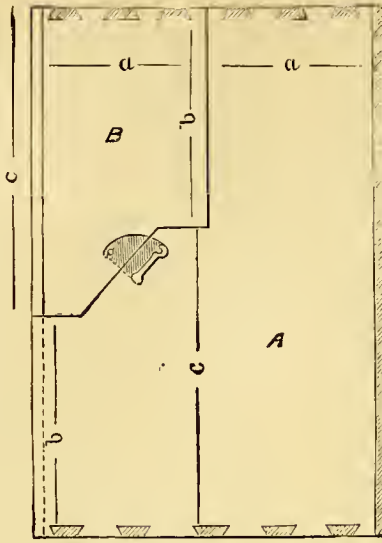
SIDE ELEVATION OF BOOK-CASE WHEN CLOSED. Scale,  $1\frac{1}{2}$  inches to 1 foot.
